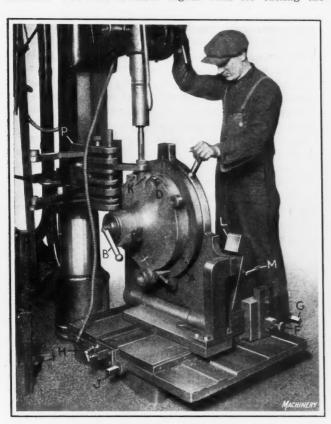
Universal Angle-plate Drilling Fixture in Position for machining Holes in a Vertical Plane
